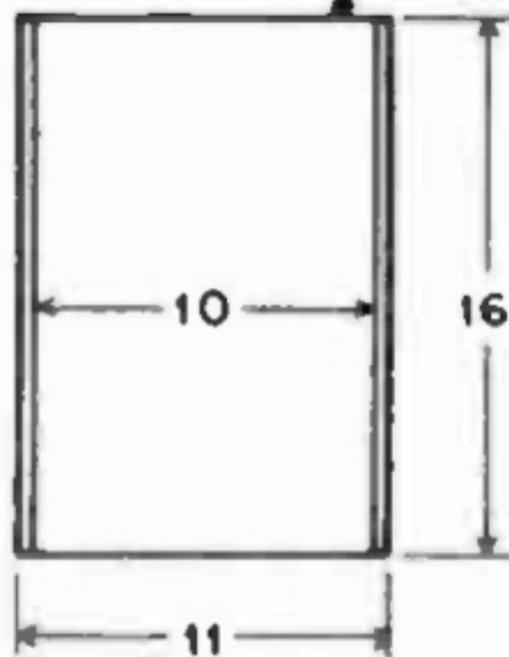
(right). Sectional drawings of the simplified corner enclosure. Fig. 6 (below). Details for cutting plywood pieces for the cabinet. 15x15 in. speaker mounting panel.
